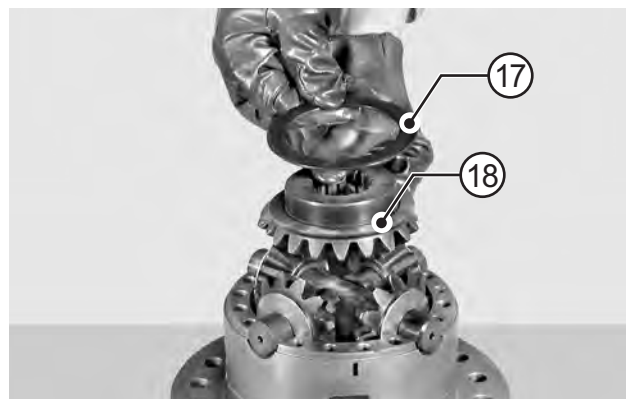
Remove shoulder (17) and first planetary gear (18).
